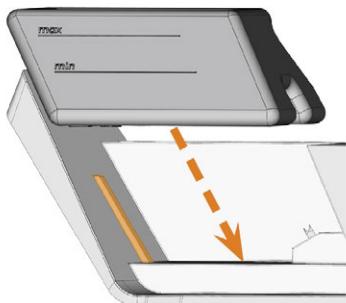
INSERTING THE COOLING LIQUID TANK INTO THE DRAWER
